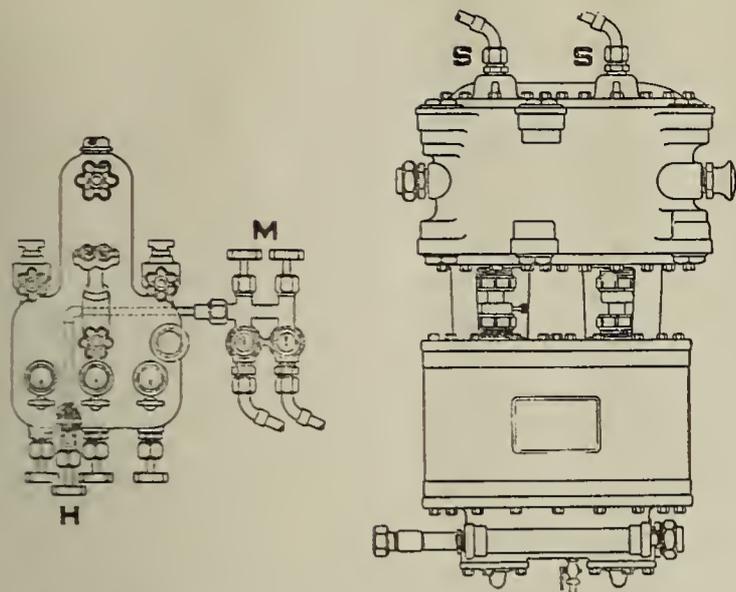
SIGHT FEED AIR CYLINDER LUBRICATOR CONNECTED TO NEW YORK AIR PUMP-H. EMERGENCY VALVE-M. DOUBLE SIGHT FEED FITTING-S. CHECK VALVE CONNECTIONS.
